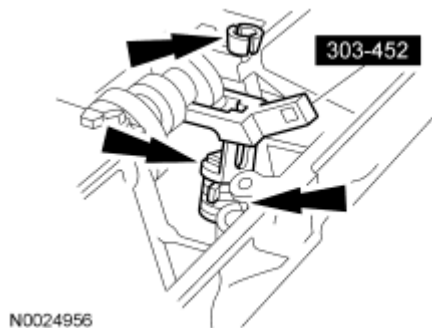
Installing Valve Spring, Valve Spring Retainer & Valve Spring Retainer Keys Using Special Tool (303-452)
